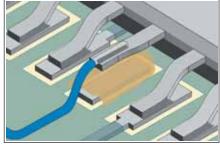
Acceptable* Wire soldered to lifted component lead. +
